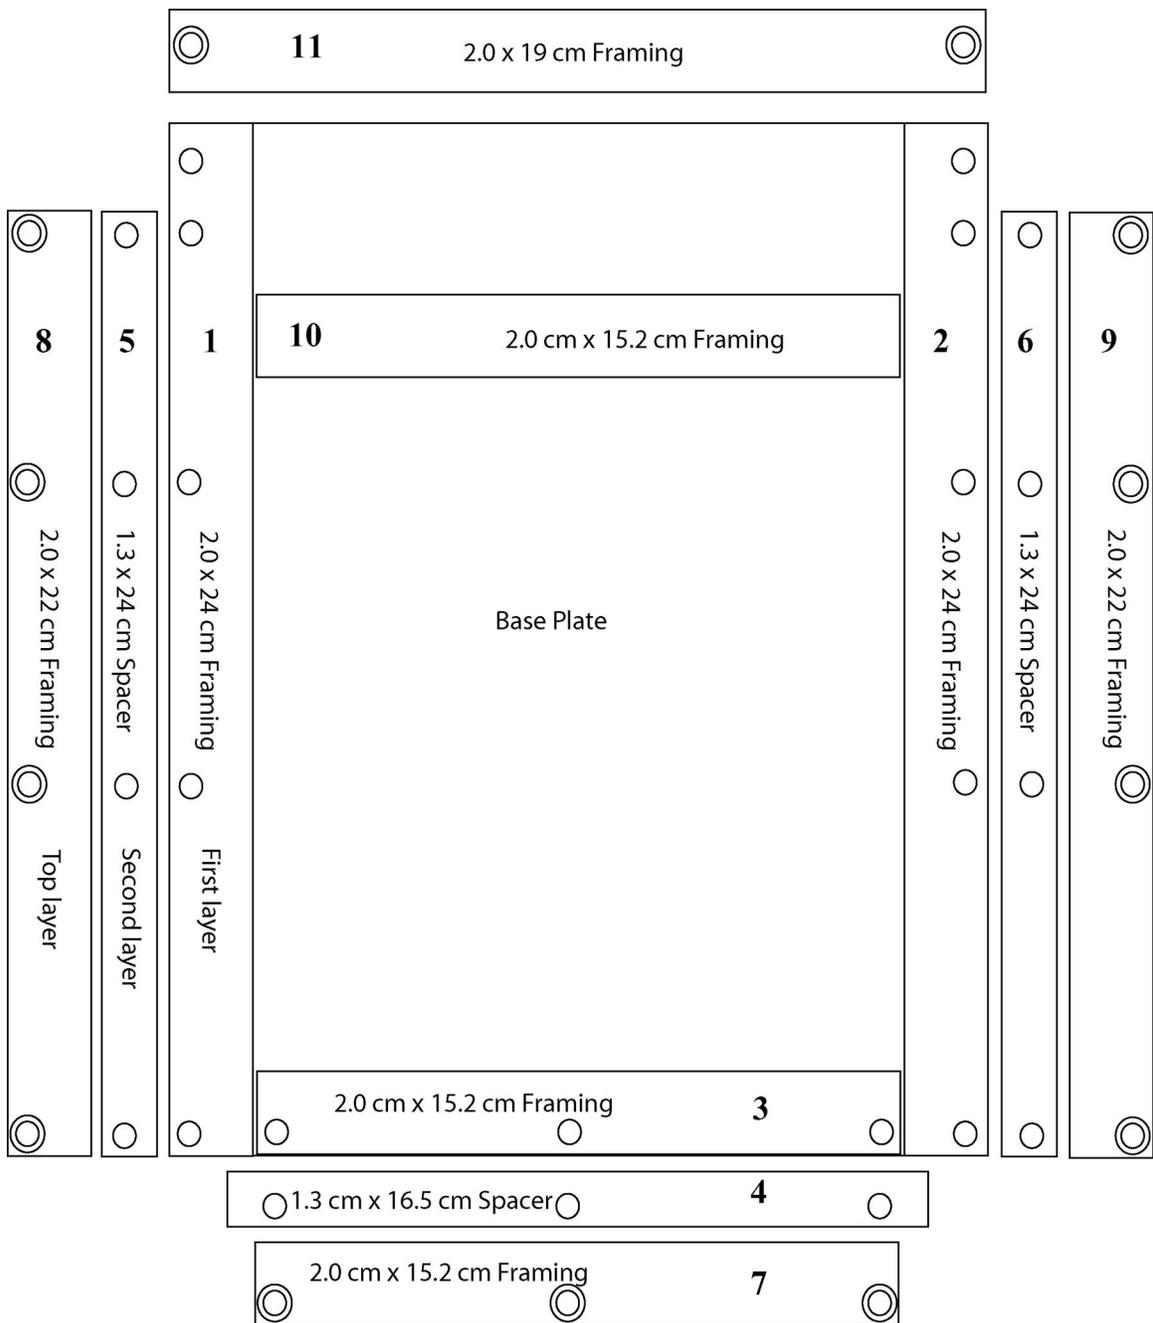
Framing pieces and spacing pieces are shown in their prospective position in relation to the base plate. The numbering in bold identifies the piece and order in which the piece should be assembled, with the lowest number assembled first. “Top pieces” 7-9 & 11 have counter sunk holes to accept counter sinking Philips head screws. Piece 10 is glued in place. Piece 11 is not installed until the shutter is slid in place.
